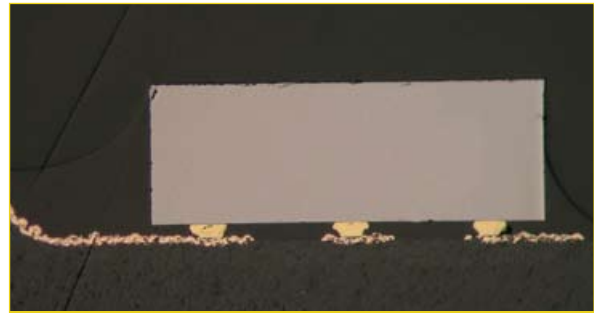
Cross-section of a Flip-Chip assembly in MID cavity with electrical lines
